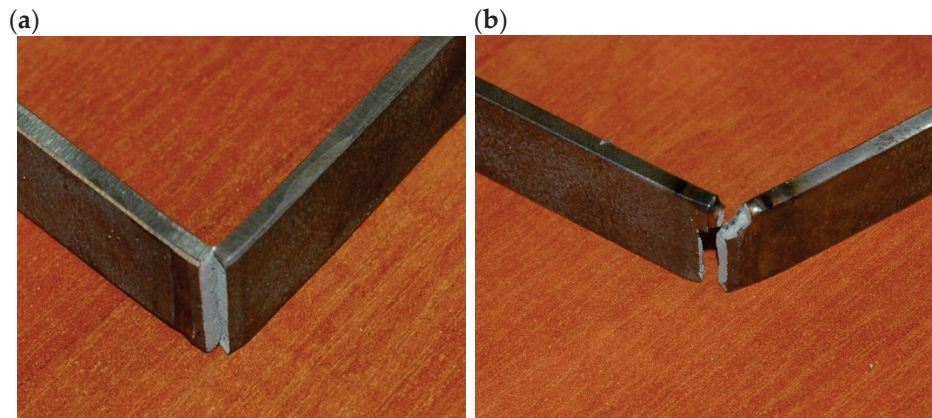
A view of the samples after technological bend test (weld root bending) of 3.0 mm thick butt joints of ArmoX 500T steel produced via autogenous laser welding (Tables 4 and 6); (a) at lowest energy input of 70 J/mm (3.0 kW, 2.5 m/min), (b) at highest energy input of 180 J/mm (1.5 kW, 0.5 m/min).
